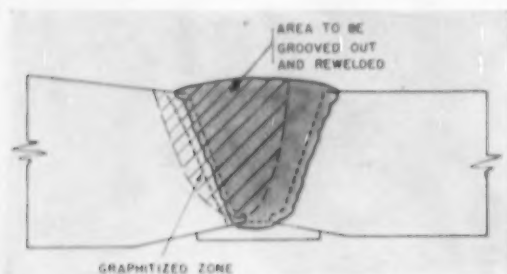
Sketch illustrating procedure for partial grooving out and rewelding of joint with graphitization on one side of the weld
